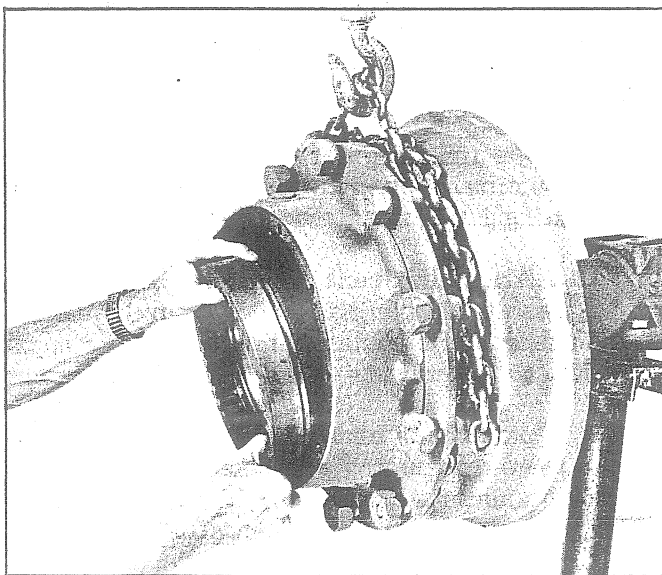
Removing or Installing Internal Planetary Ring Gear
